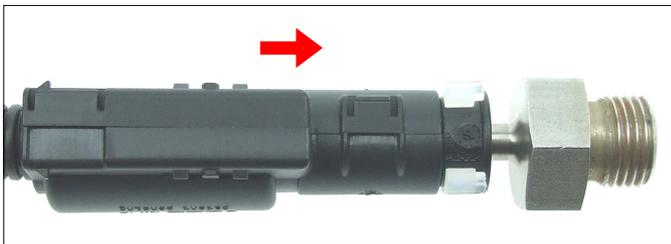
Pushing the coupling out of the locked position for disconnecting
